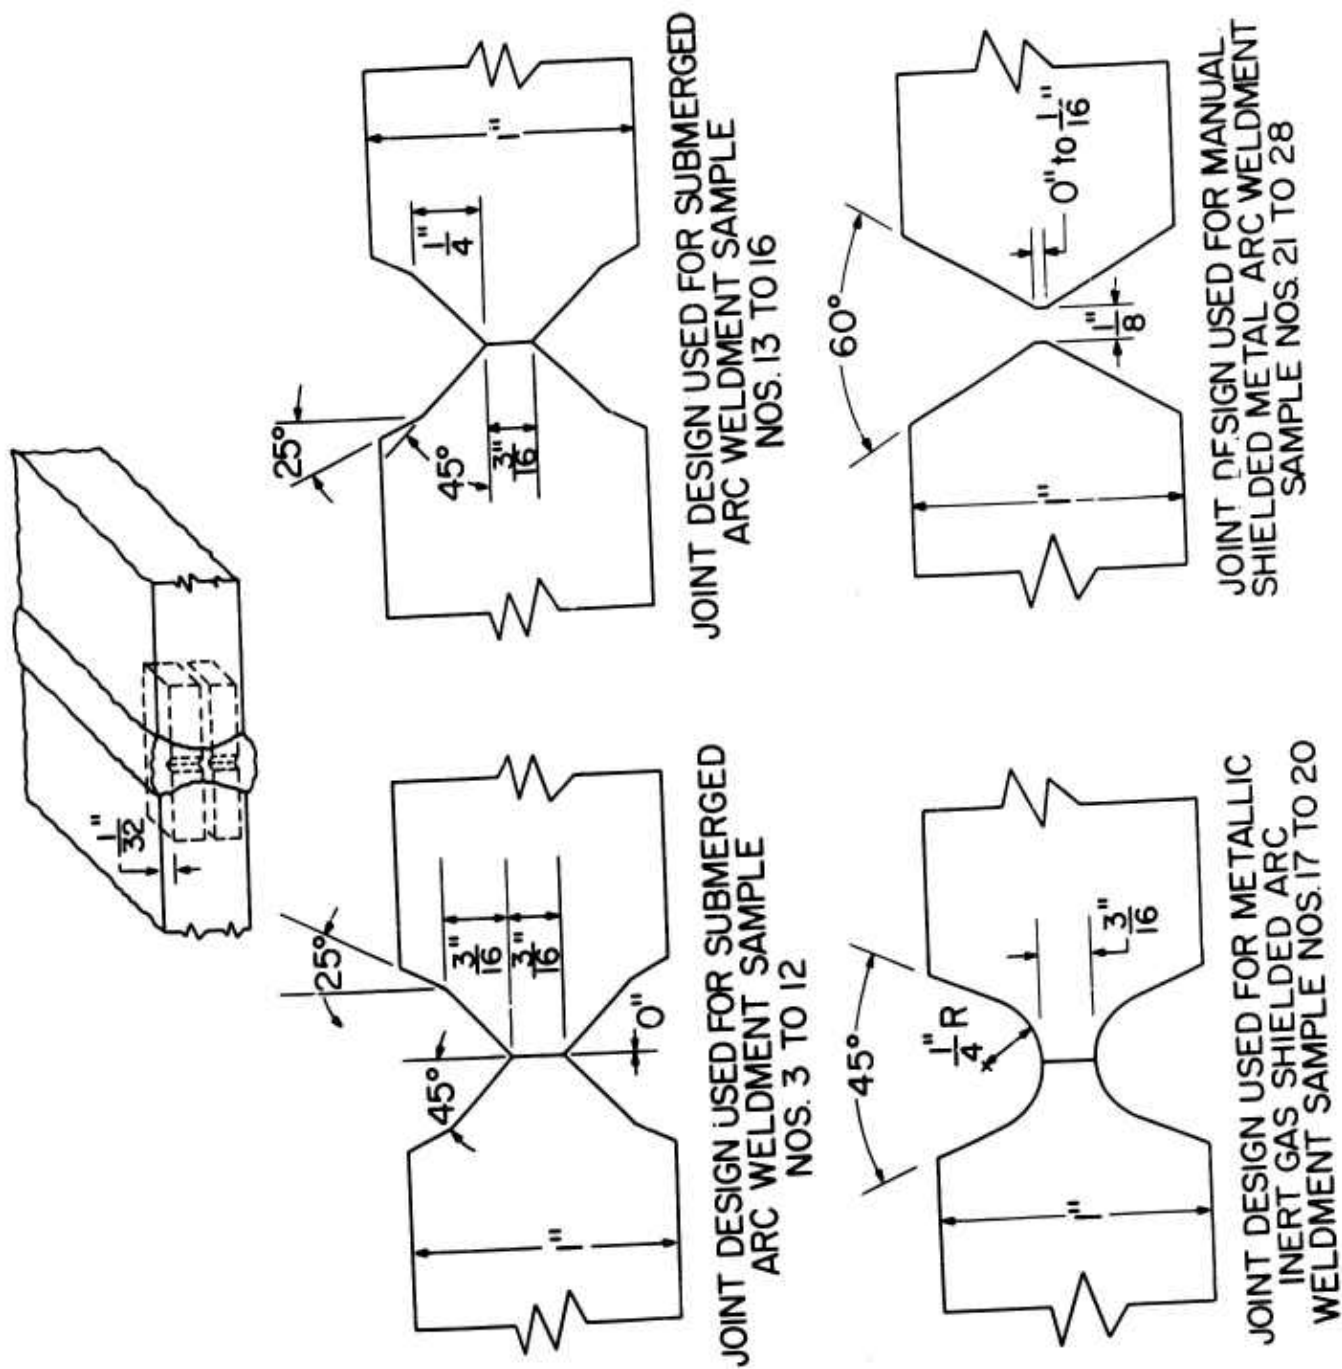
Details of specimen preparation (top) and joint designs used for various weldment samples (center and bottom)
